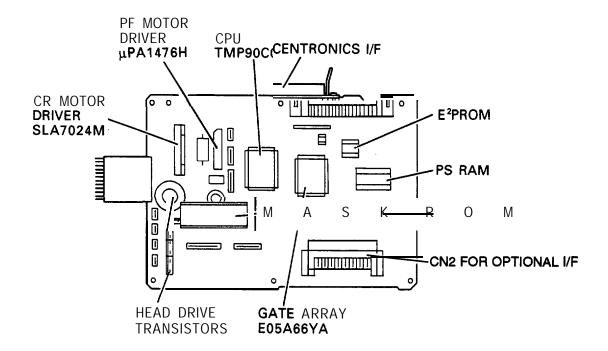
C094 MAIN Board Assembly (Main Control Circuit Board)
